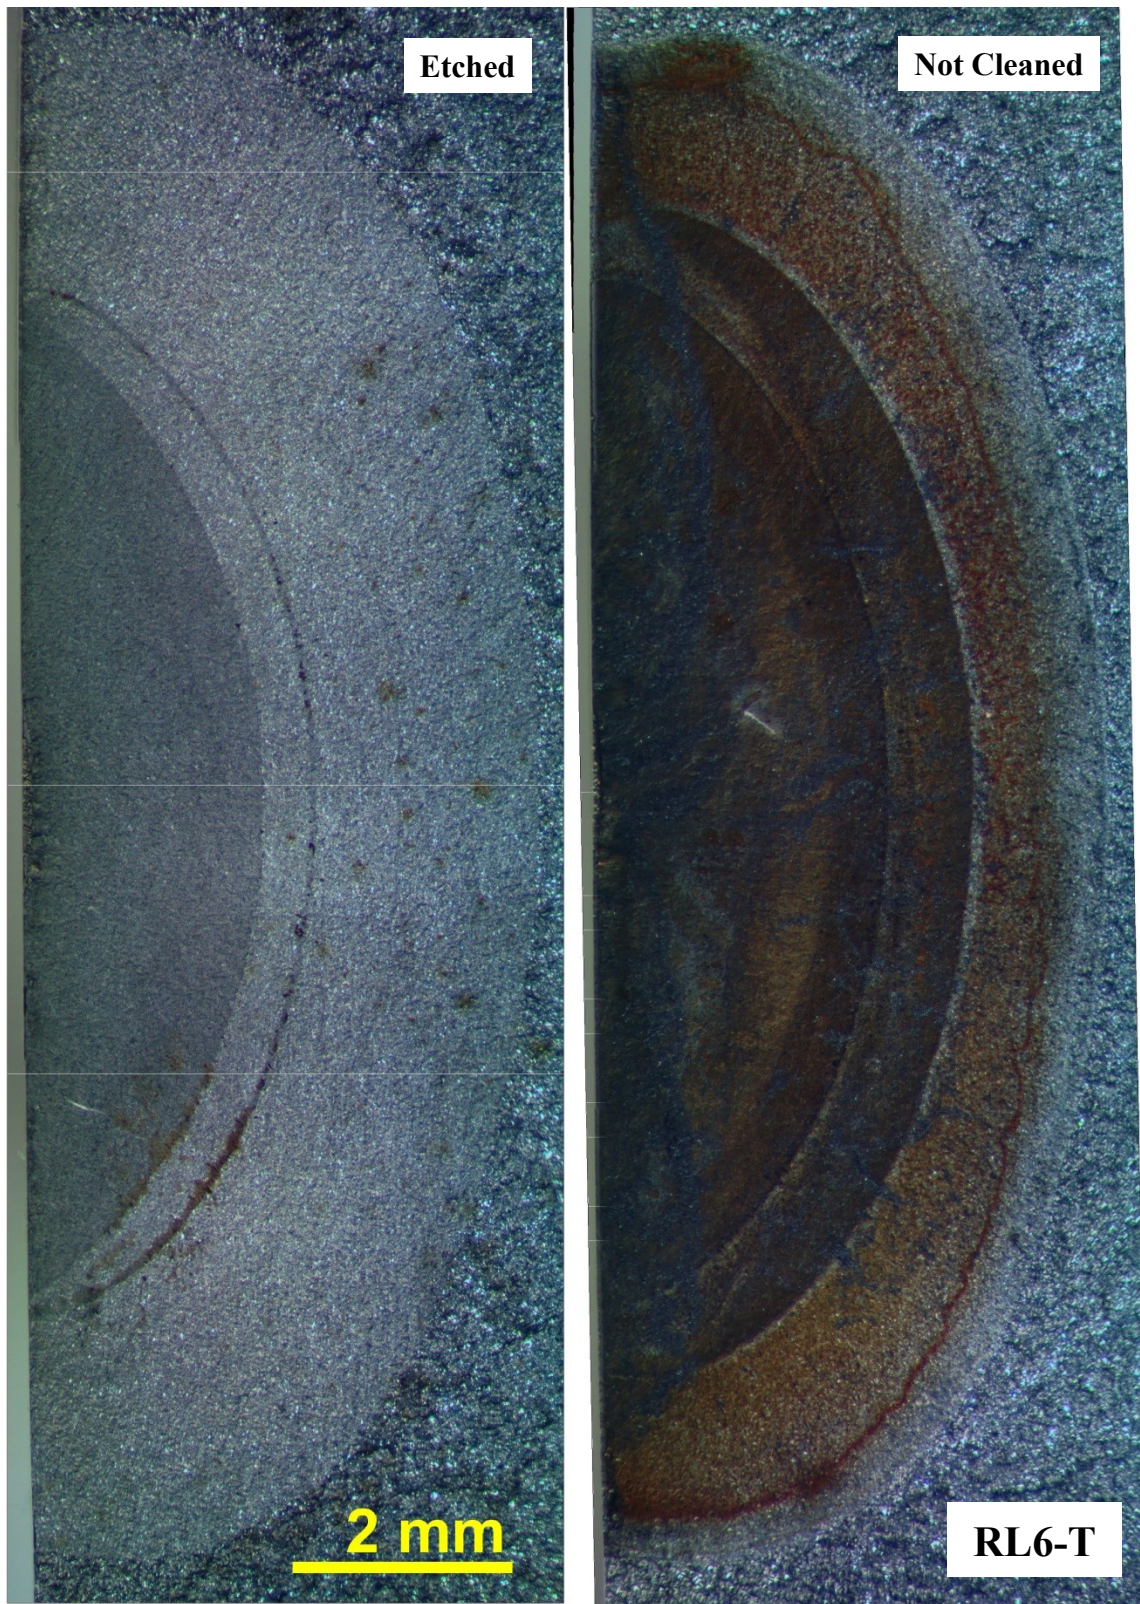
Fractograph for RL6-T. Imaged with a stereomicroscope. On the left is an etched fracture surface. On the right is a fracture surface that has not undergone cleaning.
